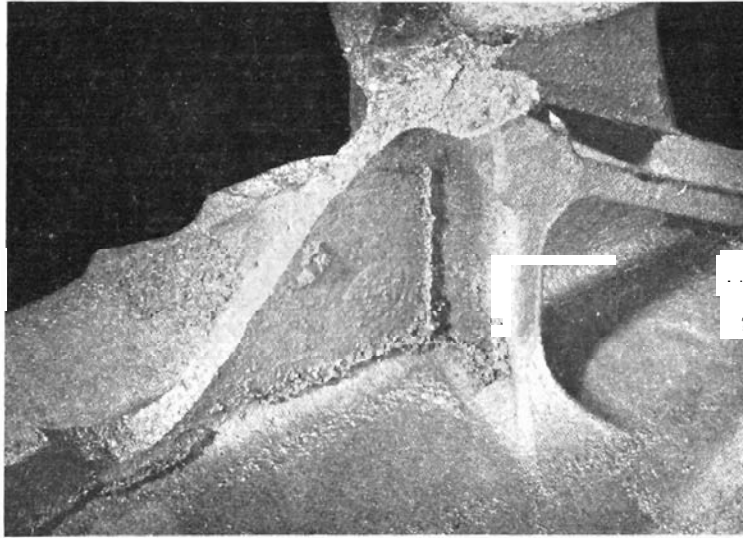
Veining caused by the penetration of cast high-duty iron into cracks in an oil-bonded core.
